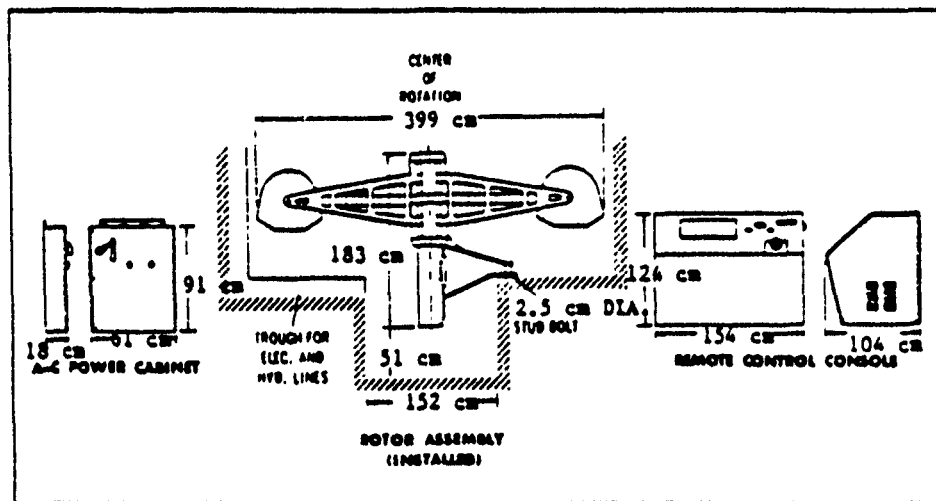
Rotary Accelerator (Model E-185) - Outline Drawing
